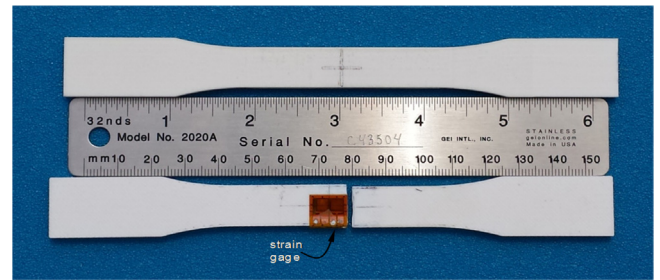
ASTM D638-08 tensile test specimen fabricated by FDM using ABS. (Overall length, 165 mm; test section length, 57 mm; test section width, 13 mm; specimen thickness, 3.5 mm).
